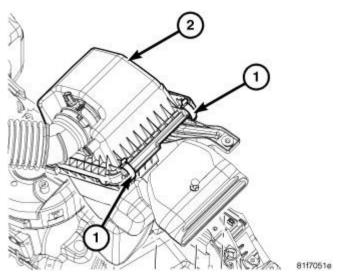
Air Filter Housing Clips Courtesy of CHRYSLER LLC
